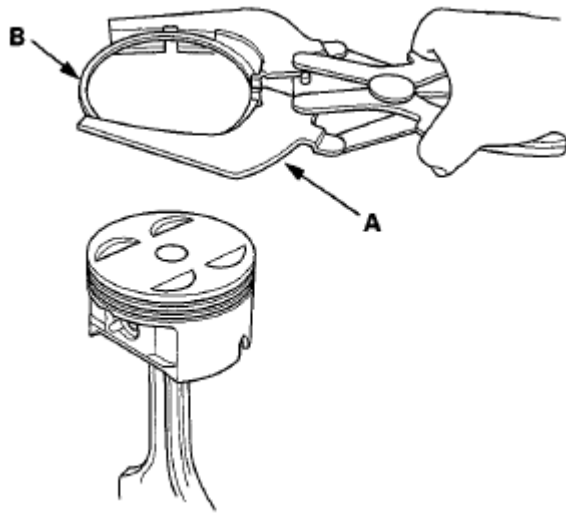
Using Ring Expander To Remove Old Piston Rings
